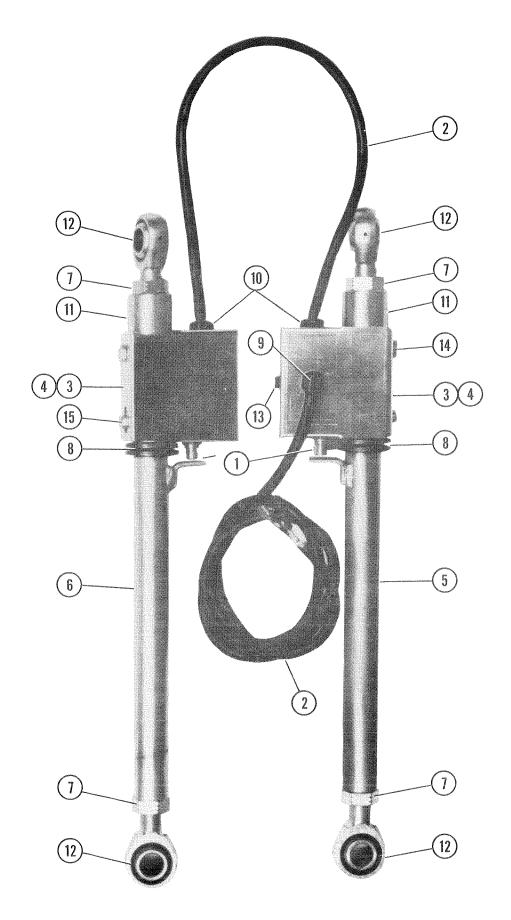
Stabilizer Activating arm Assembly - Part Number 2130
